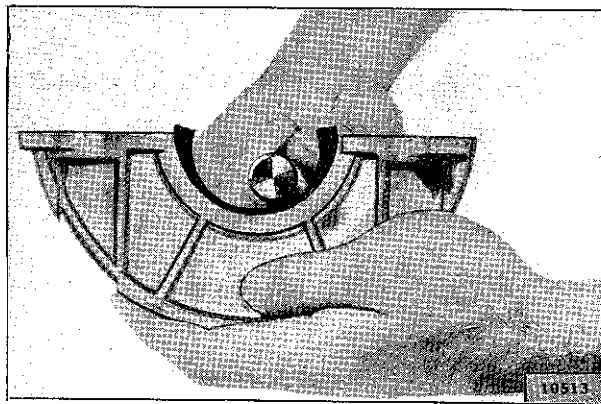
INSTALLING OIL SEAL IN CRANKSHAFT REAR FILLER BLOCK
